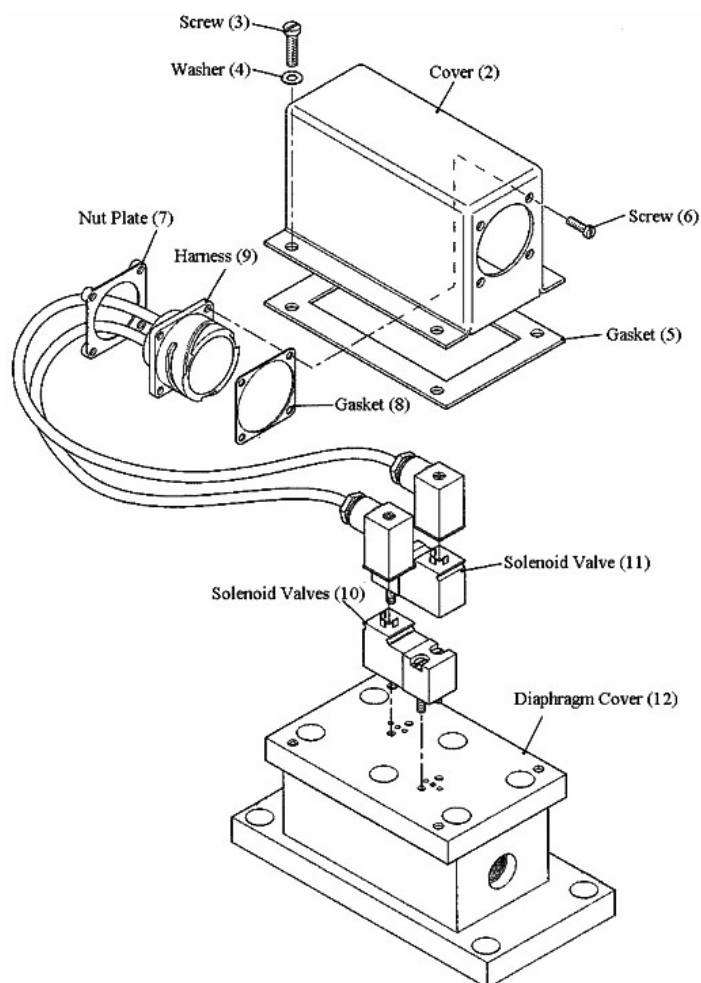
Westinghouse WSP Dump Valve – Solenoid Valve & Harness Removal
